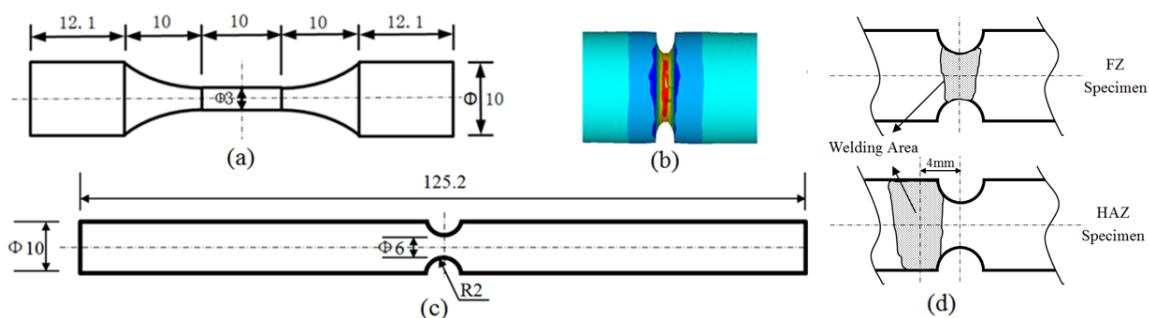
Specimens of ultrasonic fatigue test; (a) Parent specimen; (b) Stress field of welded joint specimen in mode analysis; (c) Dimensions of welded joint specimen; (d) schematic diagram of FZ and HAZ specimens
